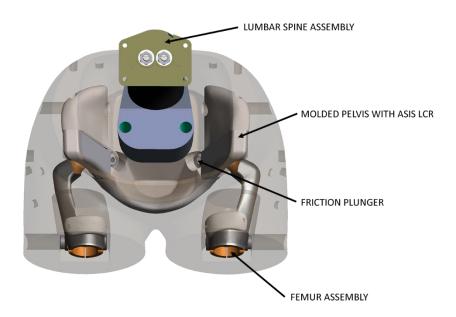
Lower torso assembly with upper legs and abdominal insert removed
